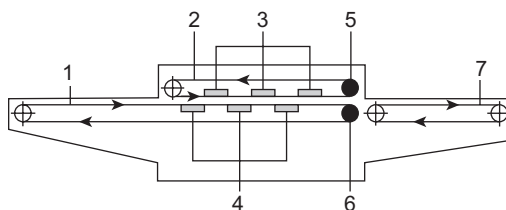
The schema of a continuous fusing press: (1) loading and feed (lower) conveyor belt, (2) upper conveyer belt, (3) upper heating zone, (4) lower heating zone, (5, 6) pressure rolls, and (7) exit conveyor belt.
